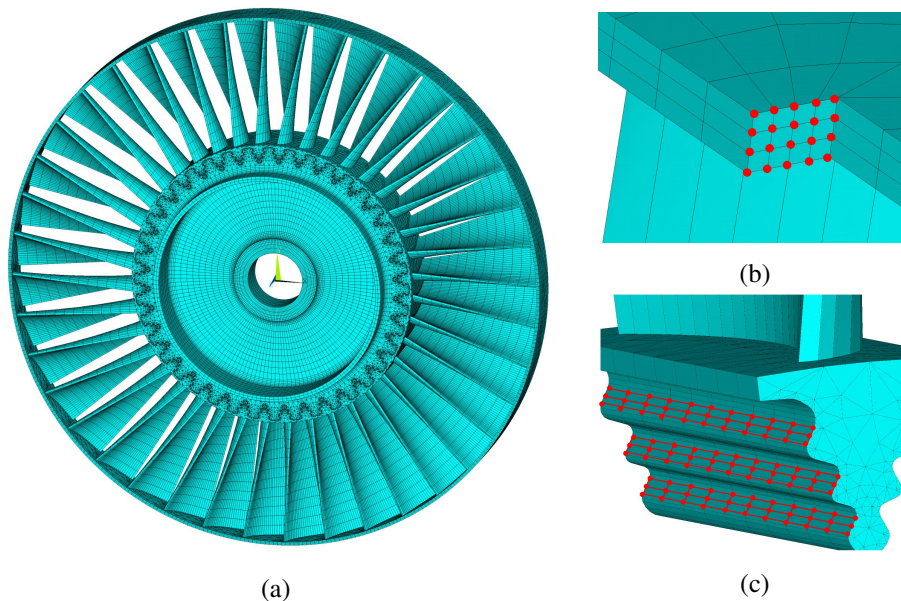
(a) Full wheel FE model of the mock up bladed disk with friction interfaces at (b) shrouds and (c) blade-root joints.
